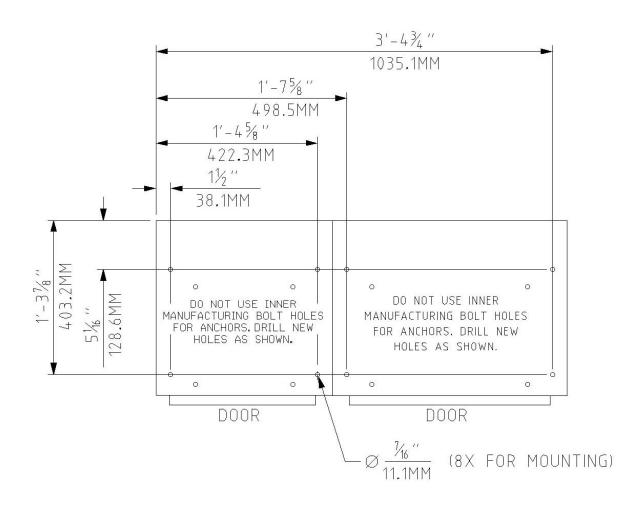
Mounting Hole Locations 1x2 Cylinder Cabinet or 1x2 Cylinder Euro Cabinet
